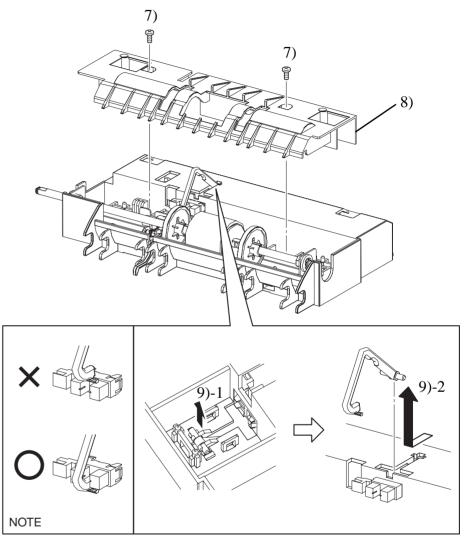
Removal of ACTUATOR NO PAPER CST (1)
